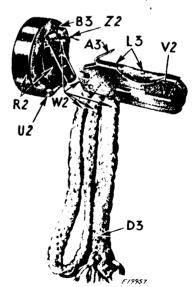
Oil-Removing Wick Assembly, Complete #146747 (Oil-Removing Wick, Holder and Spring, Complete #146746, is shown at W2, above)
